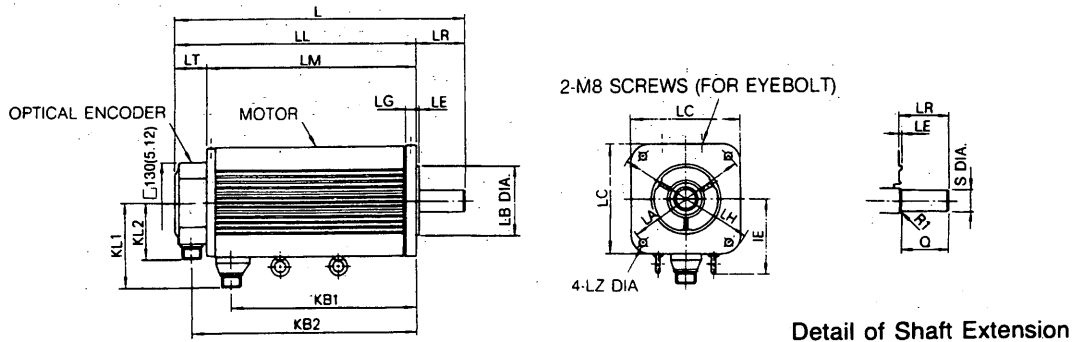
USAFED-05CS1,-09CS1 (Taper Shaft) , -13CS2 (Straight Shaft)
